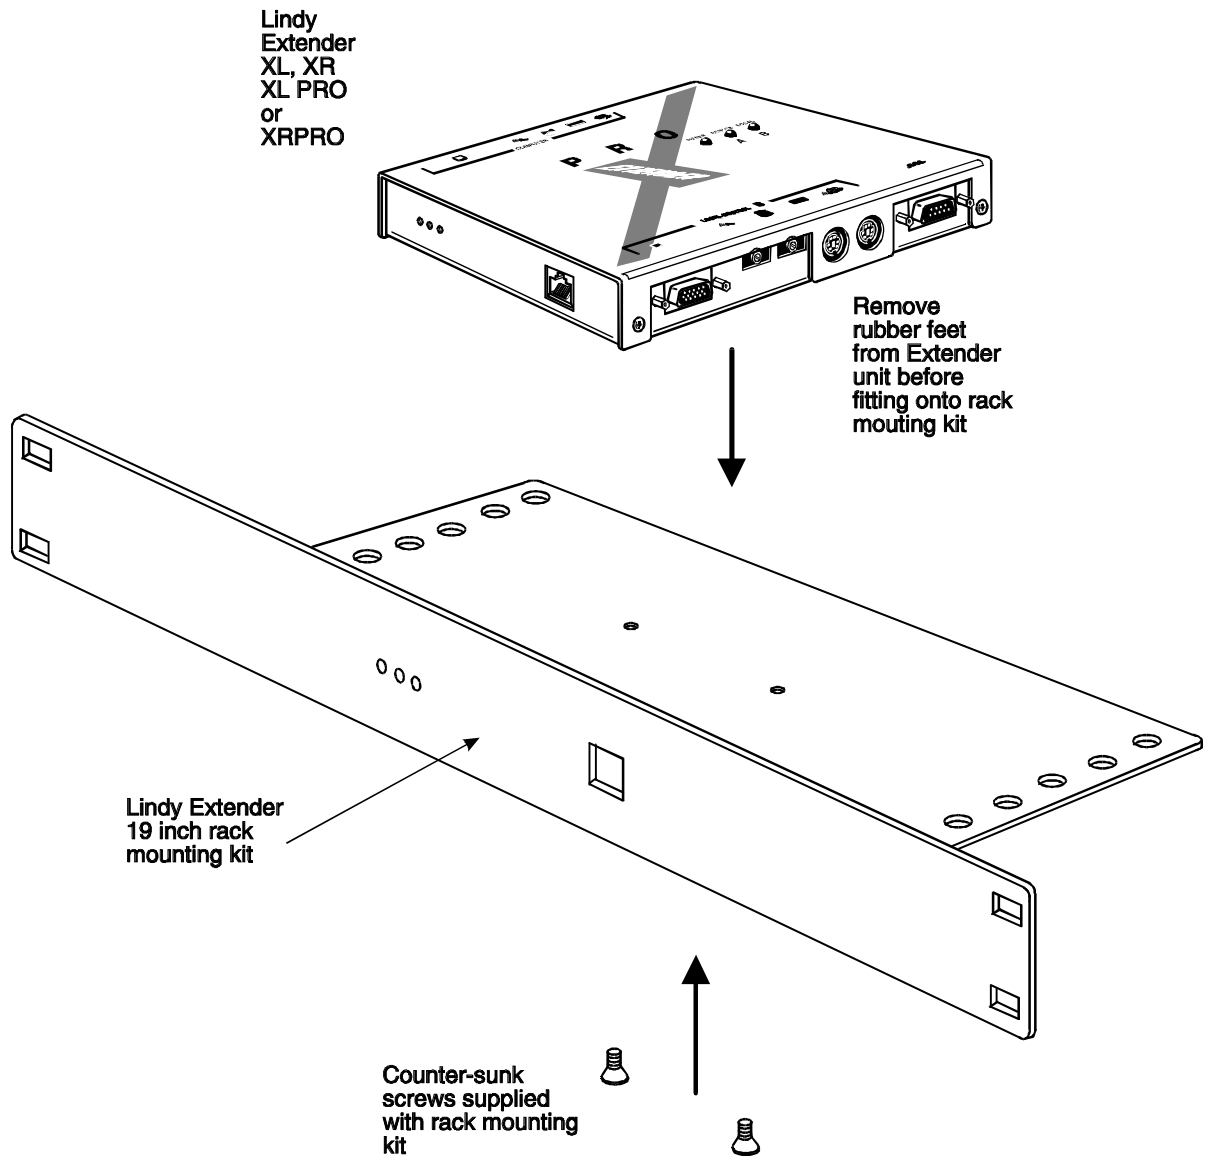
Mounting the Lindy Extender in the optional 19 inch rack mounting kit
